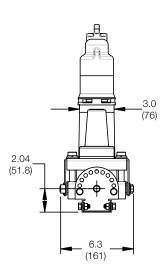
Dimensional drawing shows mounting configurations for in-line bracket.
